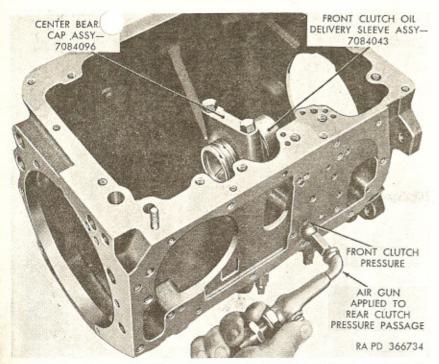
Testing front clutch oil delivery sleeve for leaks using air gun— B7950562.
